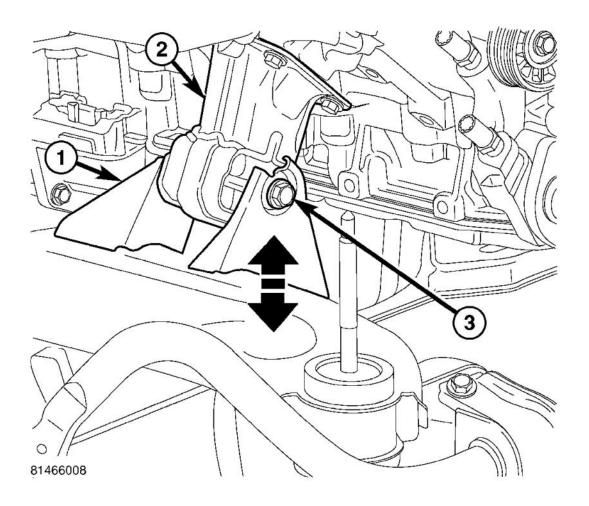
Engine Mount Bolt Courtesy of CHRYSLER LLC
